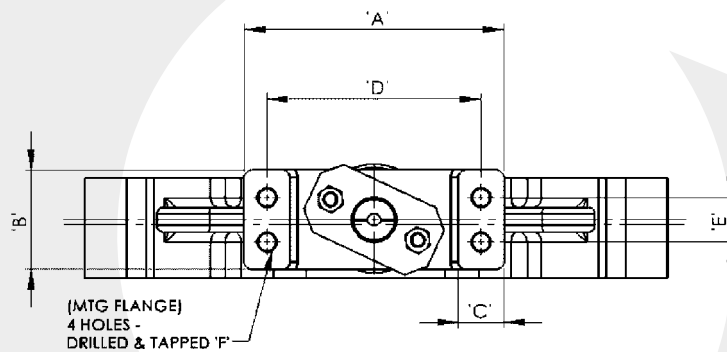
Topworks details – mounting bracket and gland mounting detail - Double-Offset (BU02)
